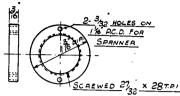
Nut for centre gear wheel (cone end) M.S. 1 off.
